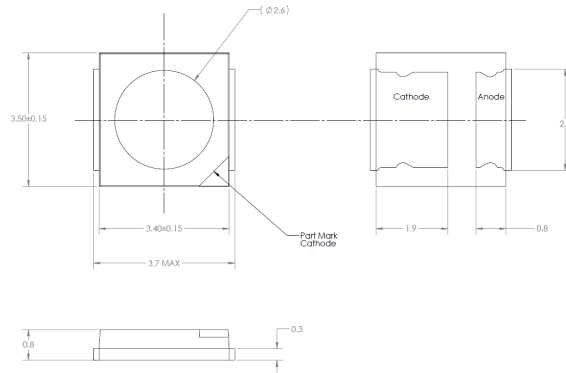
Mechanical Drawing for LUXEON 3535L. All dimensions are in millimeters.
